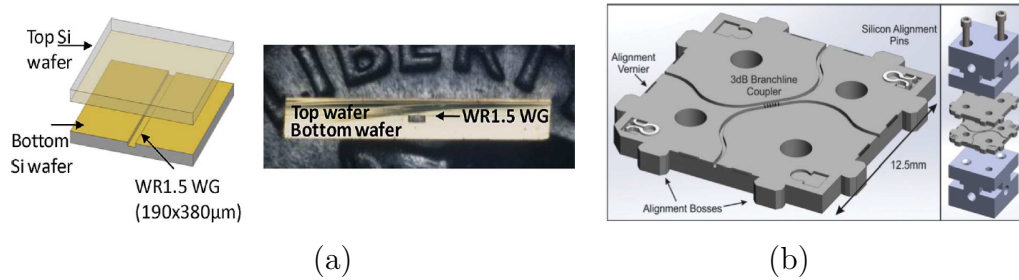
(a) (left) Schematic drawing of silicon micromachined waveguide, and (right) photograph of completed chip, [26]. (b) (left) Bottom half of silicon micro-machined 3 dB waveguide hybrid coupler, (right) exploded view of the complete test package. [28].
